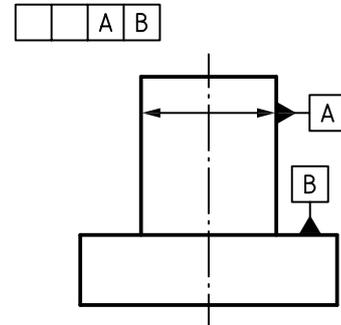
Cylinder and perpendicular plane — Input for reading (drawing indication) and for writing (design intent)
